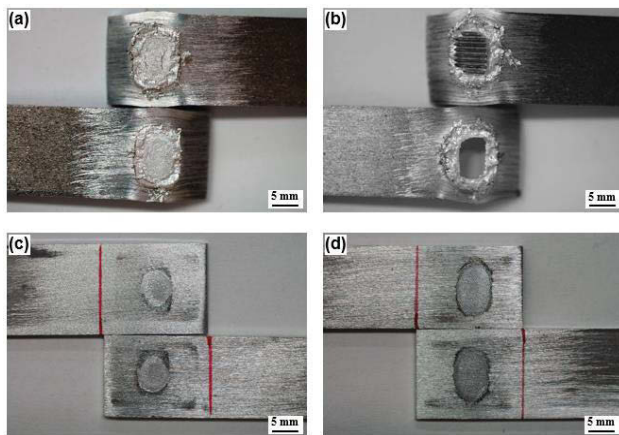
Macroscopic images of the failed tensile lap shear samples of ZEK100-ZEK100 at a welding energy of (a) 1500 J and (b) 2000 J, and ZEK100-Al5754 at a welding energy of (c) 500 J and (d) 1500 J.
